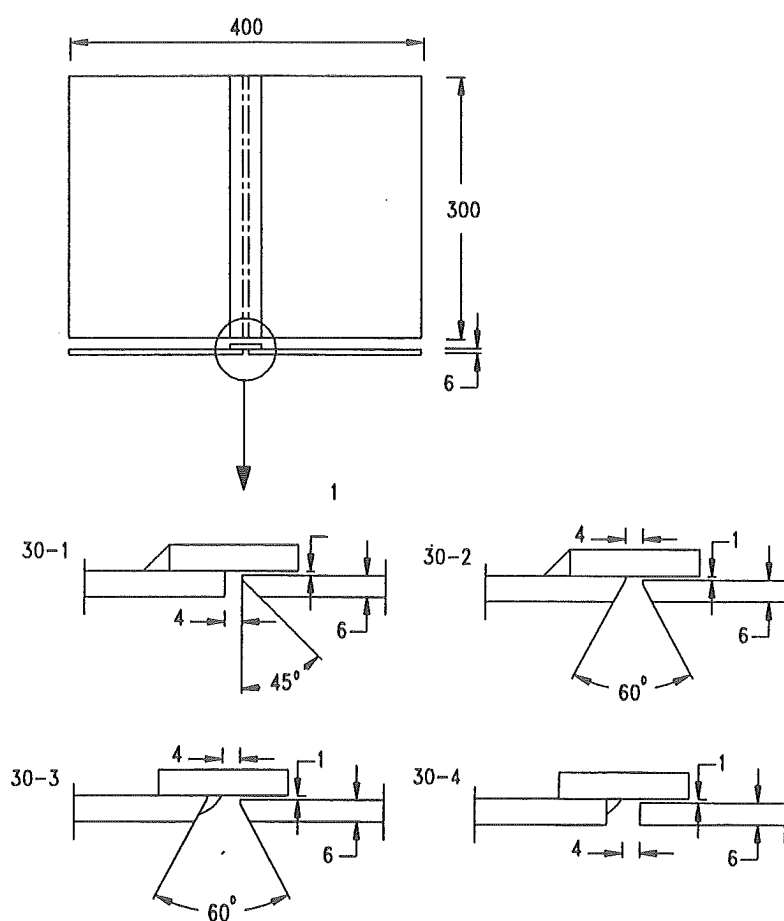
Specimens welding tests stiffener splice joint.
